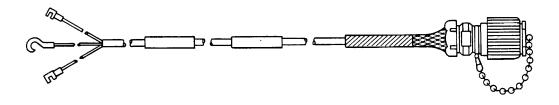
Cable Assembly CX-4694C/U, drawing number SC-D-374107.
